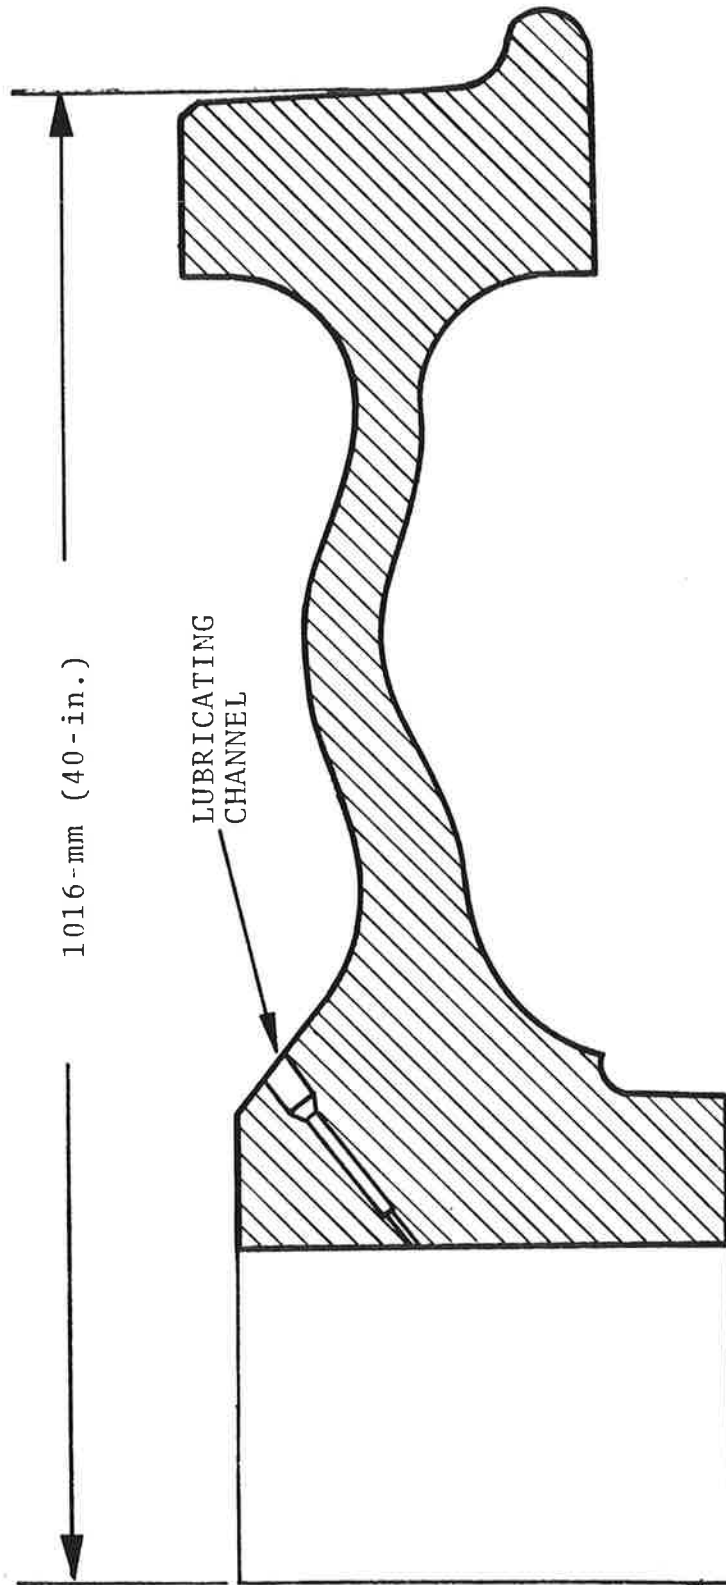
MODIFIED DIAGRAM OF THE S-SHAPED WHEEL USED ON THE INSTRUMENTED WHEELSET (AFTER SURAHAMMAR DRAWING NO. 3.1749.2)
